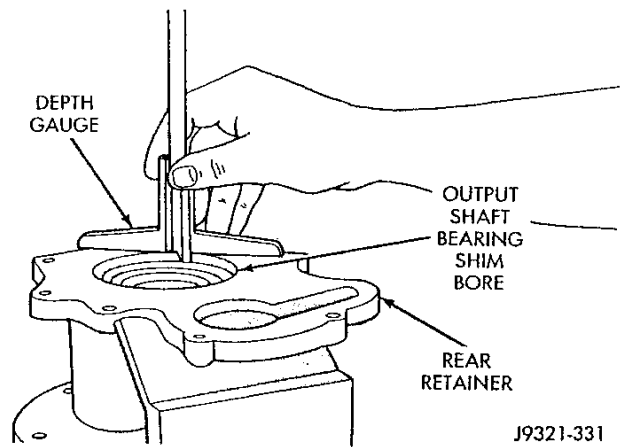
Measuring Depth Of Output Shaft Bearing Shim Bore (In Rear Retainer)
